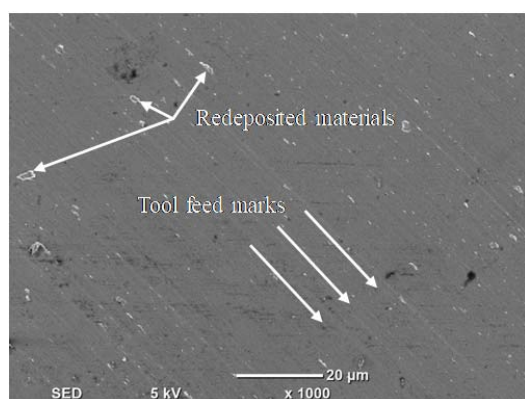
SEM images of the machined surfaces at the cutting speed of 80m/min and radial depth of cut of 2.4 mm
